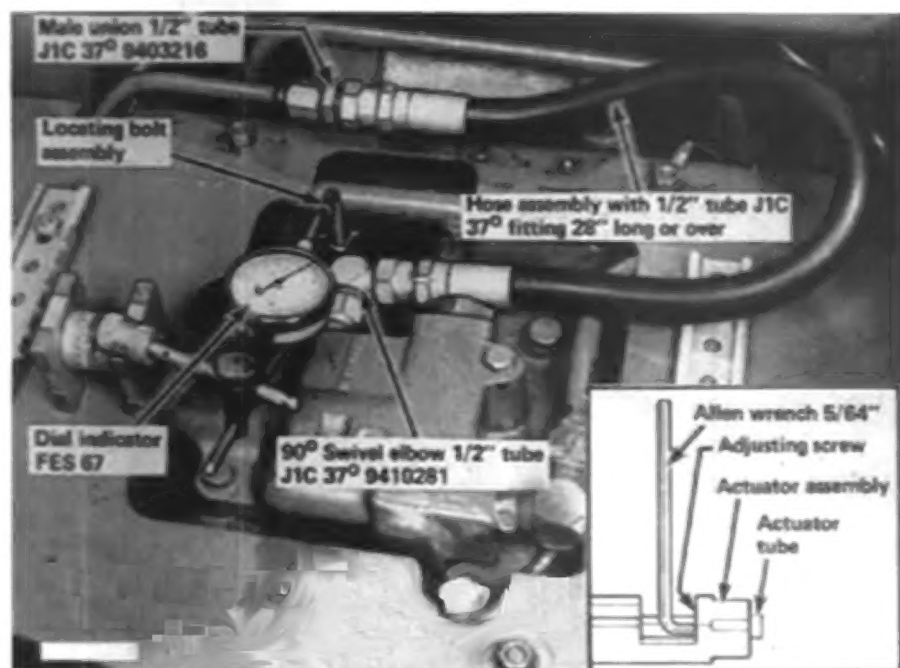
Dial indicator and locating bolt being used to adjust the drop poppet valve. Refer to text.
